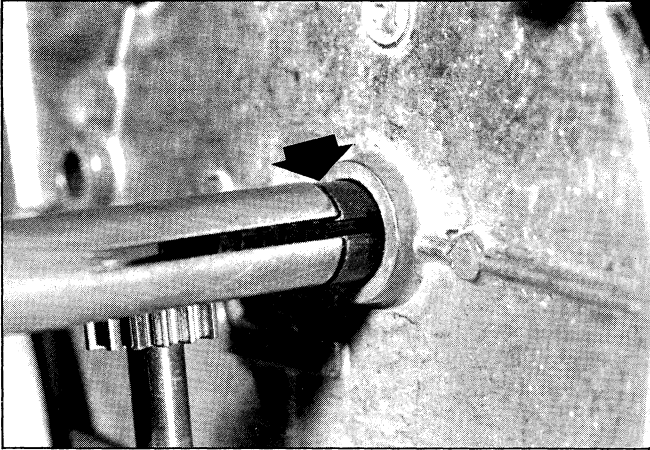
Aligning slot in open end of long dummy shaft with slot in wheel shaft.
